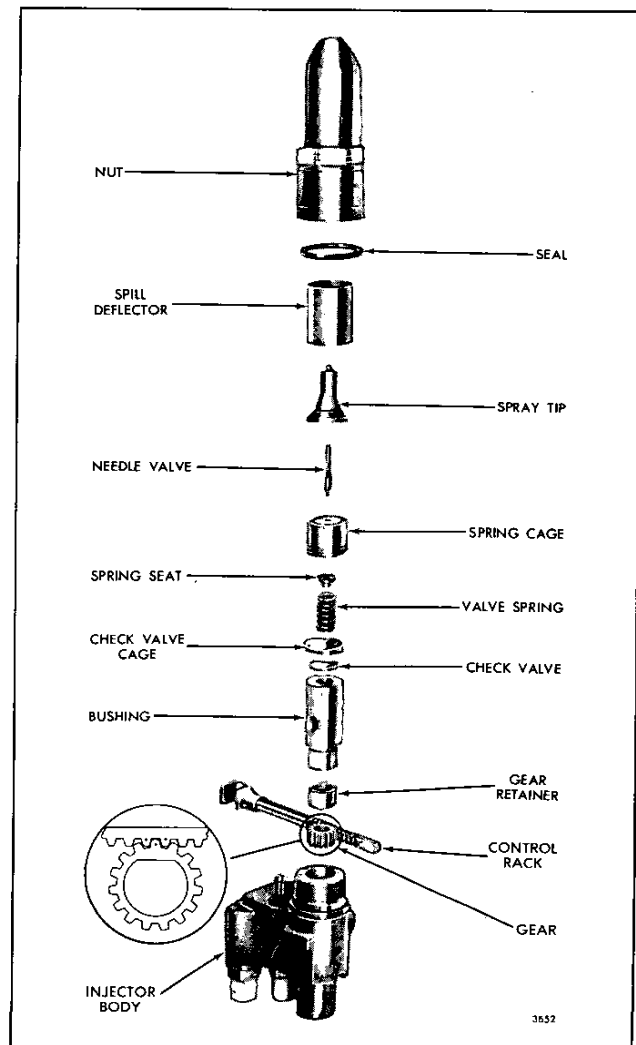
Injector Rack, Gear, Spray Tip and Valve Assembly Details and Relative Location of Parts
